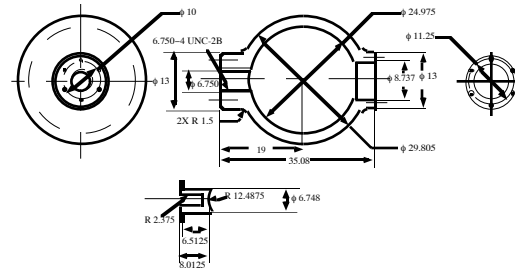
Engineering sketch of the Jumbino vessel. The steel plug inserted into the left (as shown) end is shown below the sketch. All dimensions are in inches.
